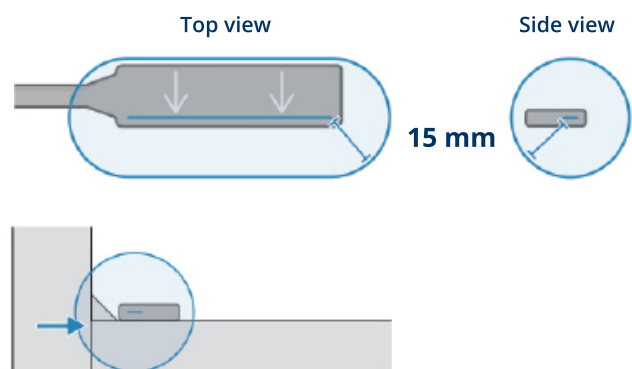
Crack detection zone top view (top left), side view (top right), when placed close to a fillet weld (bottom).
